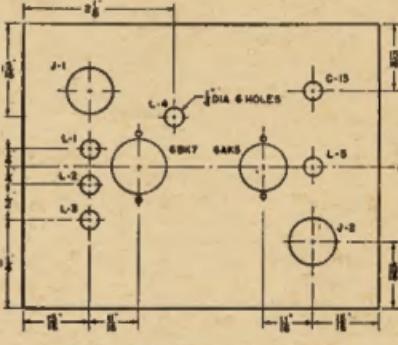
Panel layout of the S/N-6 Pre-Amplifier (back elevation).
